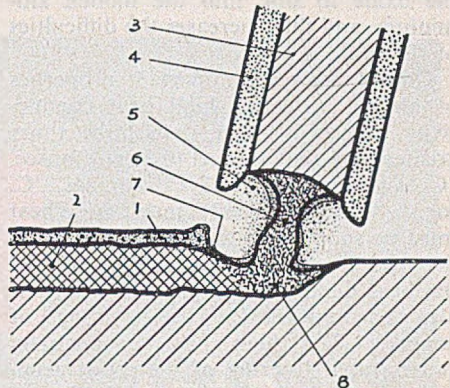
Electrode during welding. (Metal transfer.)
